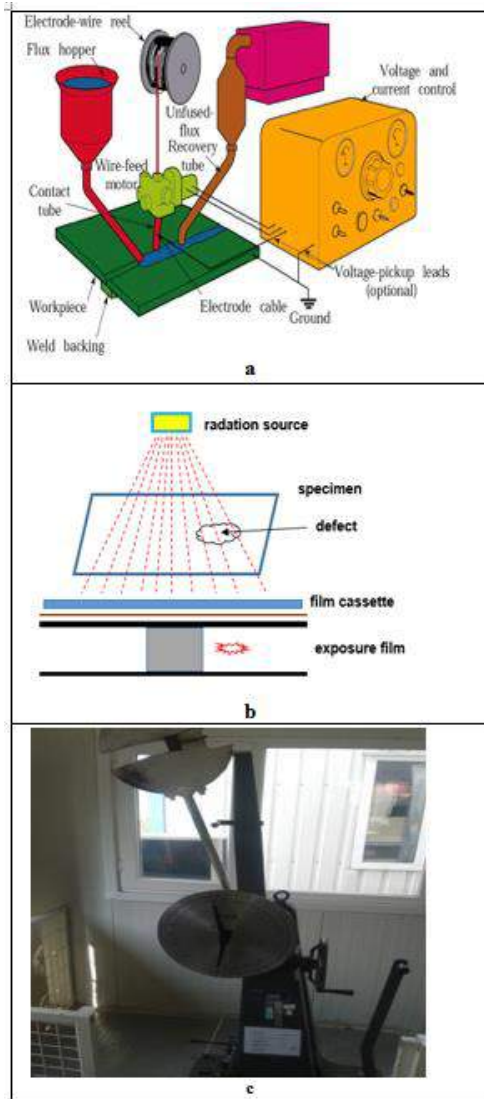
Working principle of (a) submerged arc welding, (b) radiography test and (c) notch impact test
